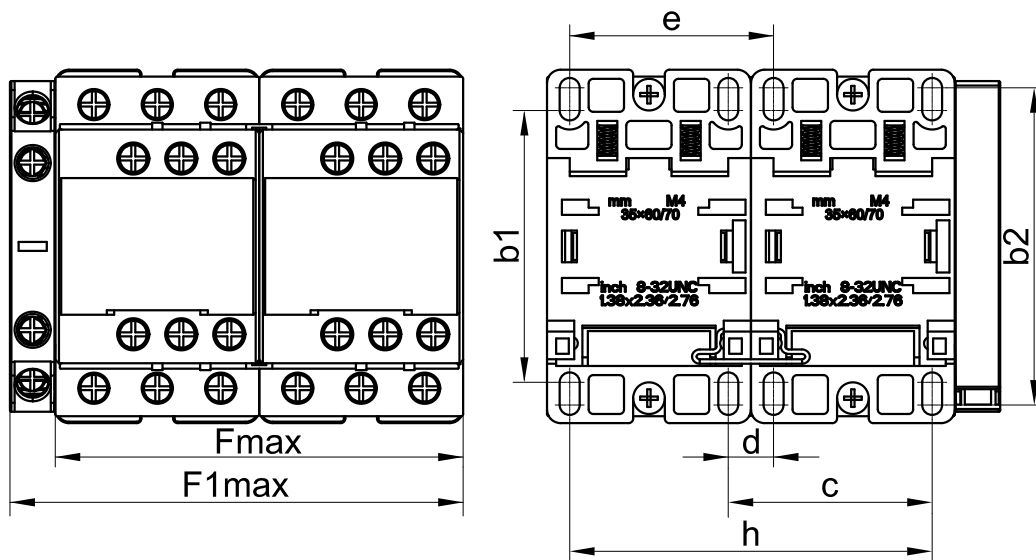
HDCX-09~38 reversible contactor overall installation dimension
